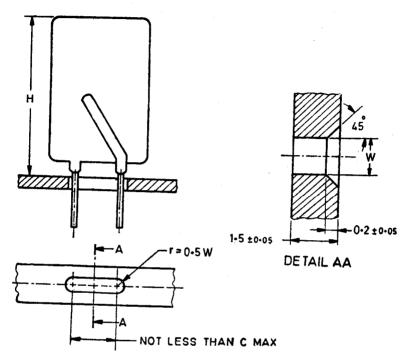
Measurement of Dimensions of Rectangular Capacitors of Plate Type
